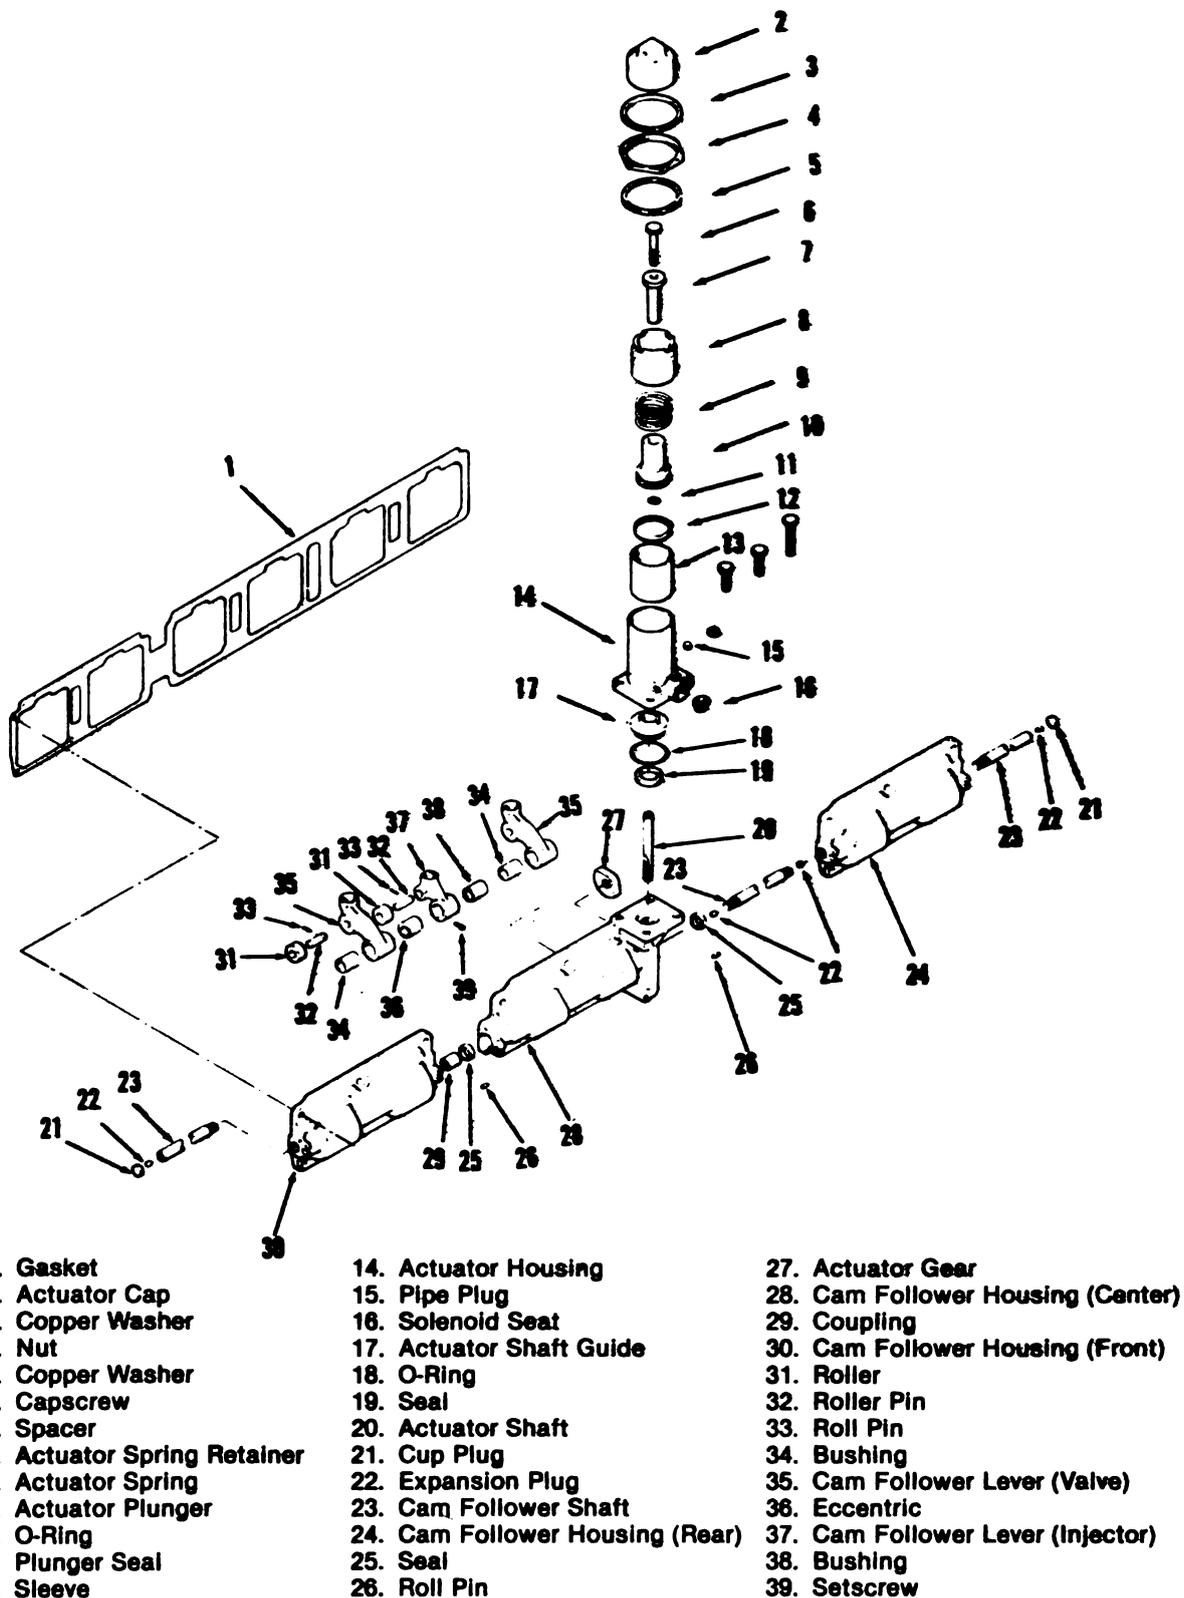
Exploded View Of Cam Follower Housing And Actuator (MVT).
